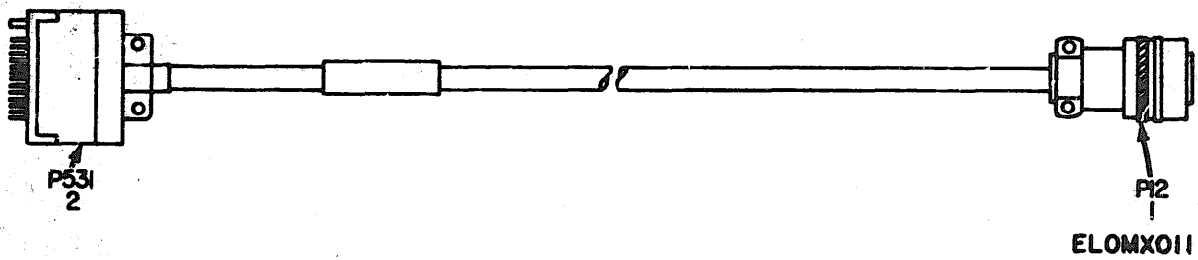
Cable Assembly, Special Purpose, Electrical CX-7565/ASM-63 998937-01. 01 (W8).
